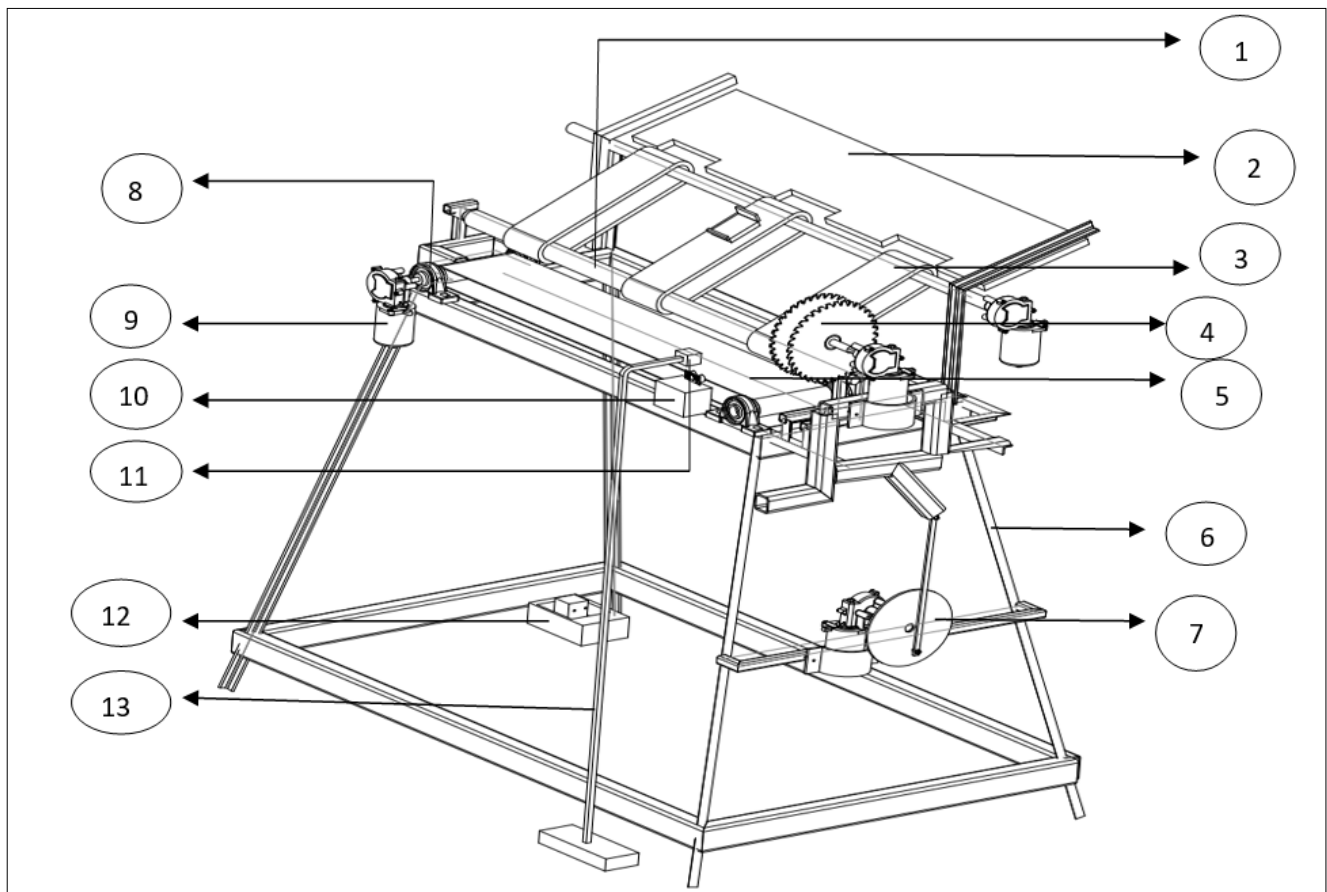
Isometric view of battery-operated automated sugarcane single bud sett cutter. 1. Shaft 2. Stacker 3. Vertical conveyor 4. Serrated Disc 5. Vertical conveyor 6. Mainframe 7. Cam 8. Pillow block bearing 9. Motor 10. Ultrasonic sensor 11. Web camera 12. Electronic components box (Arduino Board, Raspberry PI 5, relay) 13. Stand.
